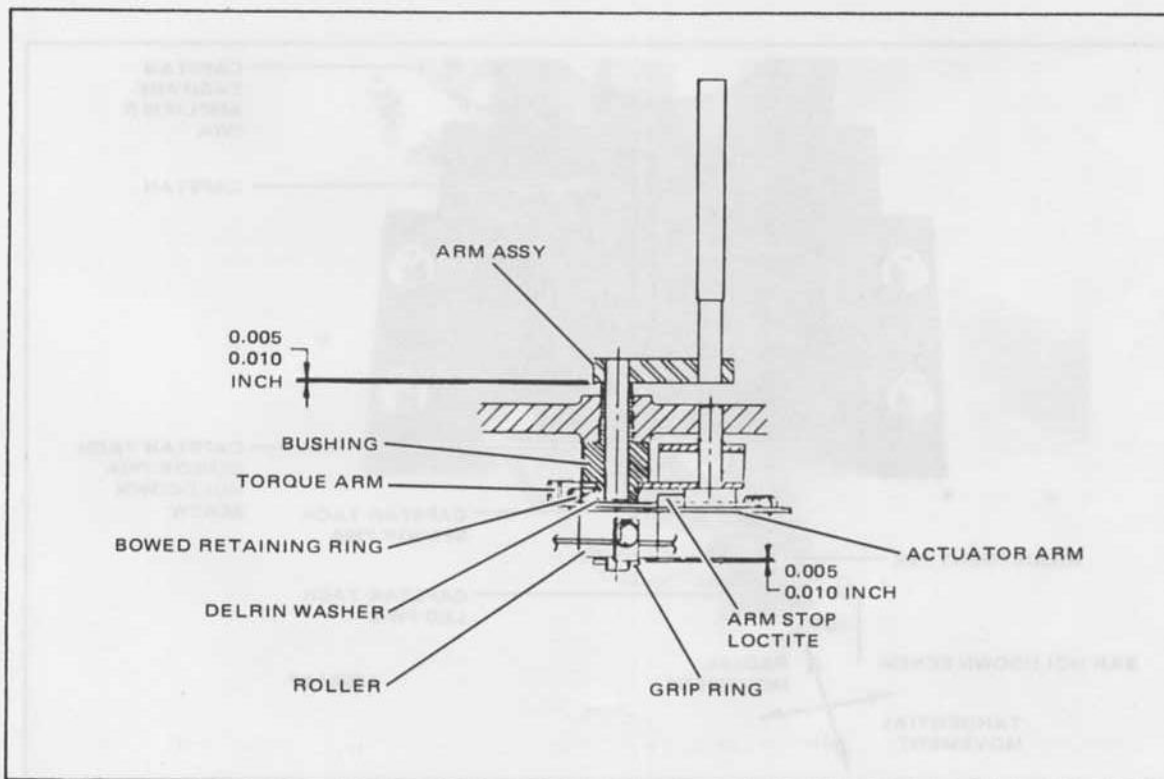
Tape Lifter Arm Assembly Cross Section
